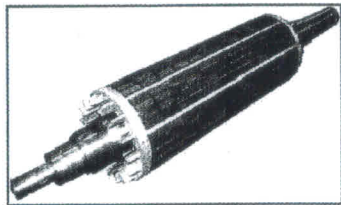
A rotor with NdFeB magnets segmented along the axial and circular direction
